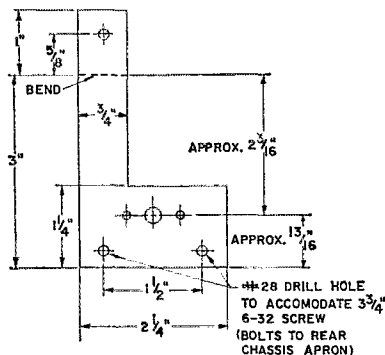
Mounting bracket for the variable capacitor. Dimension X should place the capacitor shaft at the same distance from the chassis as the shaft of the original a.g.c. control. Both rotor and stator of the APC-B must be insulated from the mounting.
